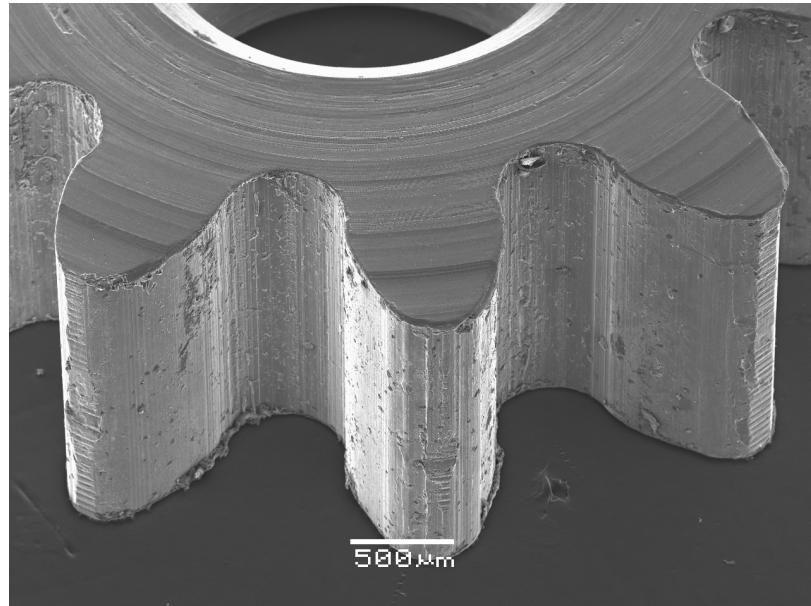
SEM image of the gear wheel component in ALU 6060
